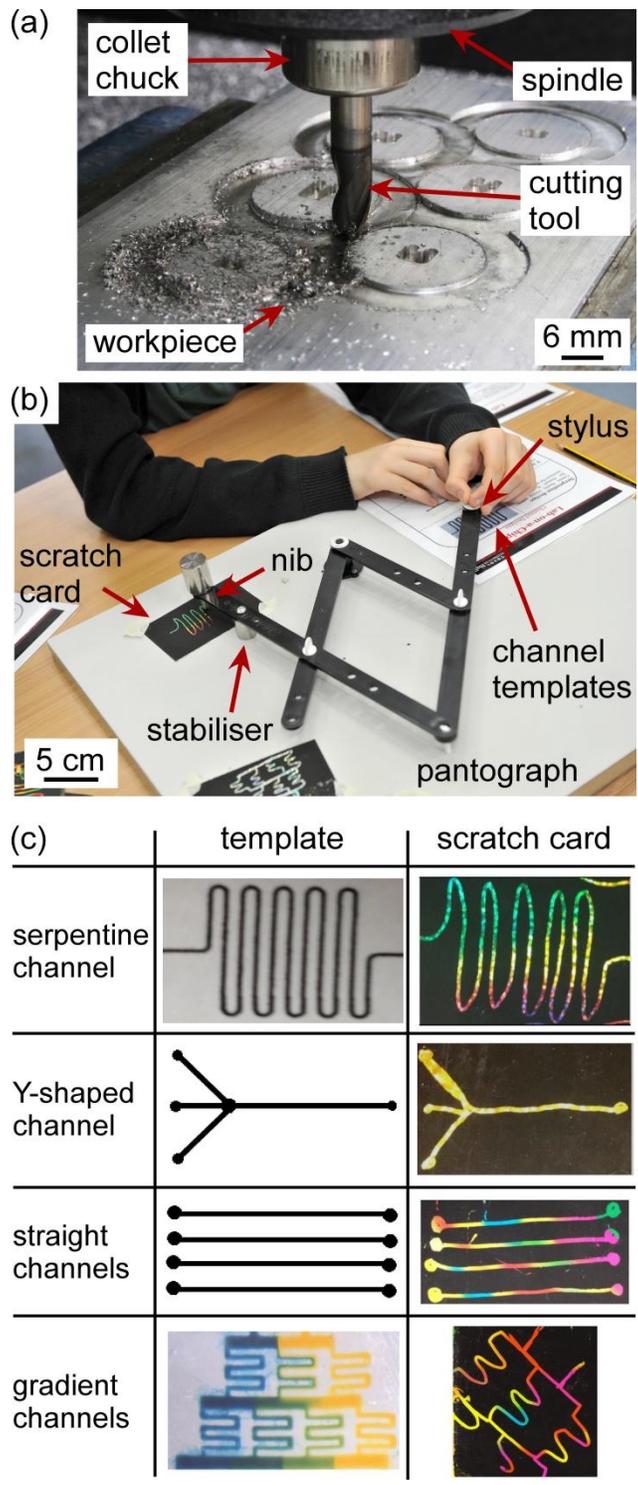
(a) Photograph of a tool cutting a design into a metal workpiece. The example shown would then be taken for use as a master for injection moulding, (b) Pantograph being used by a student to etch a channel design from a template into a scratch art card. (c) The channel designs on the template and the resultant designs transferred to the scratch art cards.
